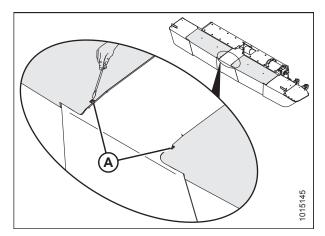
Cutterbar Door Latch Access Hole – Export Only
